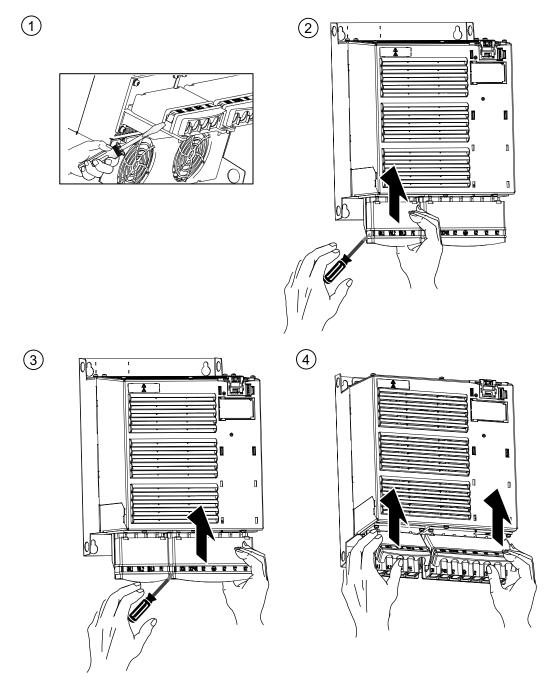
Access to the line and motor terminals for Liquid Cooled Power Modules
